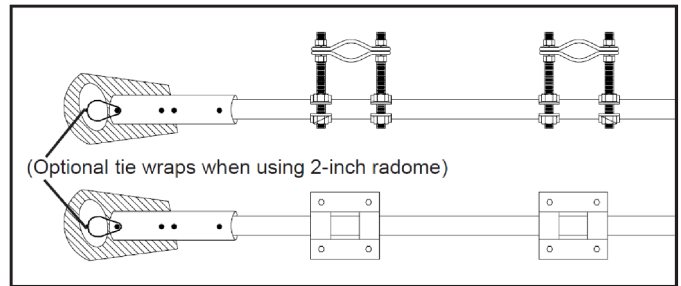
DB5004S-MTD™ Fiberglass Outrigger Assembly.
